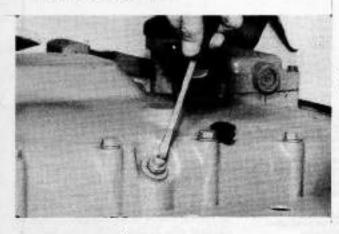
View showing location of adjustment hole plug and screw for rear planetary brake bands.
